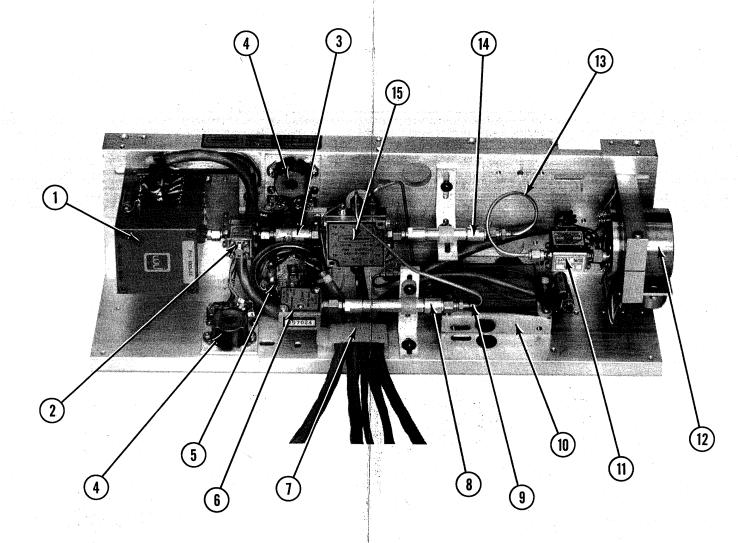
RF Deck Assembly - 6621A/6621A-40/6629A/6629A-40/6637A/6637A-40/6638A/6647A/6648A
